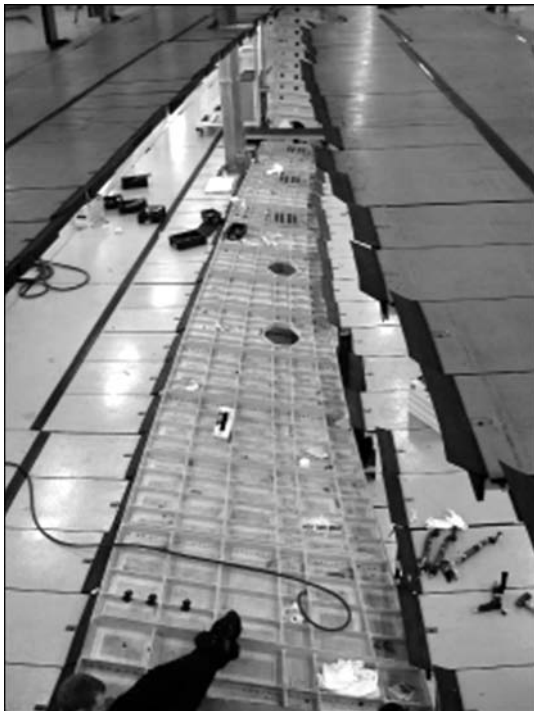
Assembly of airbus A-380 wing in AIRBUS UK using large-sized panels welded by electron beam (photo was given by company AIRBUS)
